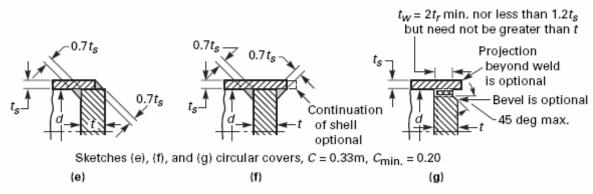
Weld details from Fig. UG-34. Fig. UG-34(f) is identical to LAr vessel weld
